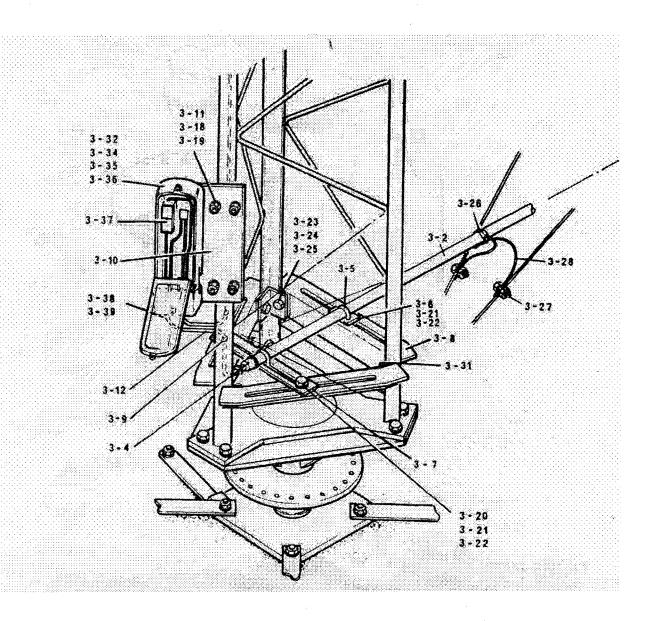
A – Lighting Transformer Support Tube and Fuse Box Mounting
